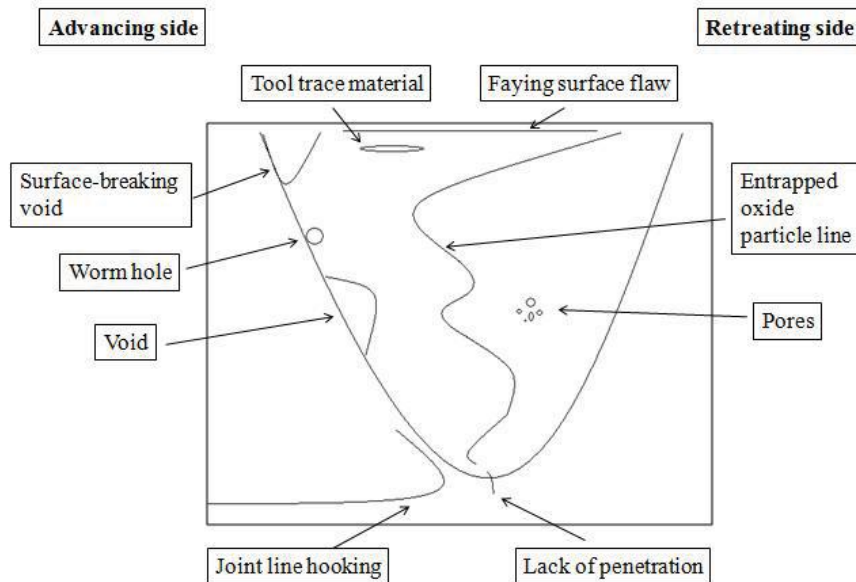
A schematic presentation of the location of different welding defects in copper FSW welds. [9]
